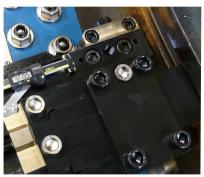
LDSF Custom Radial Index Feed Tool Slide
